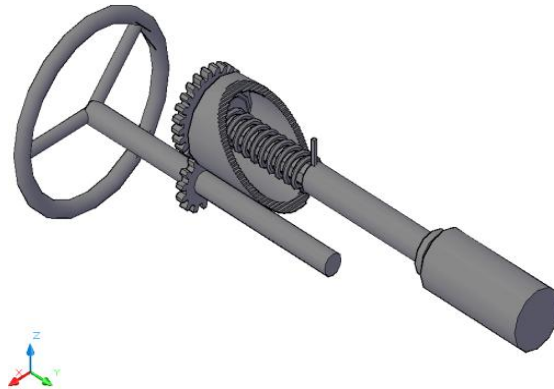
Pictorial Projection for Assembly Drawing of SSS
